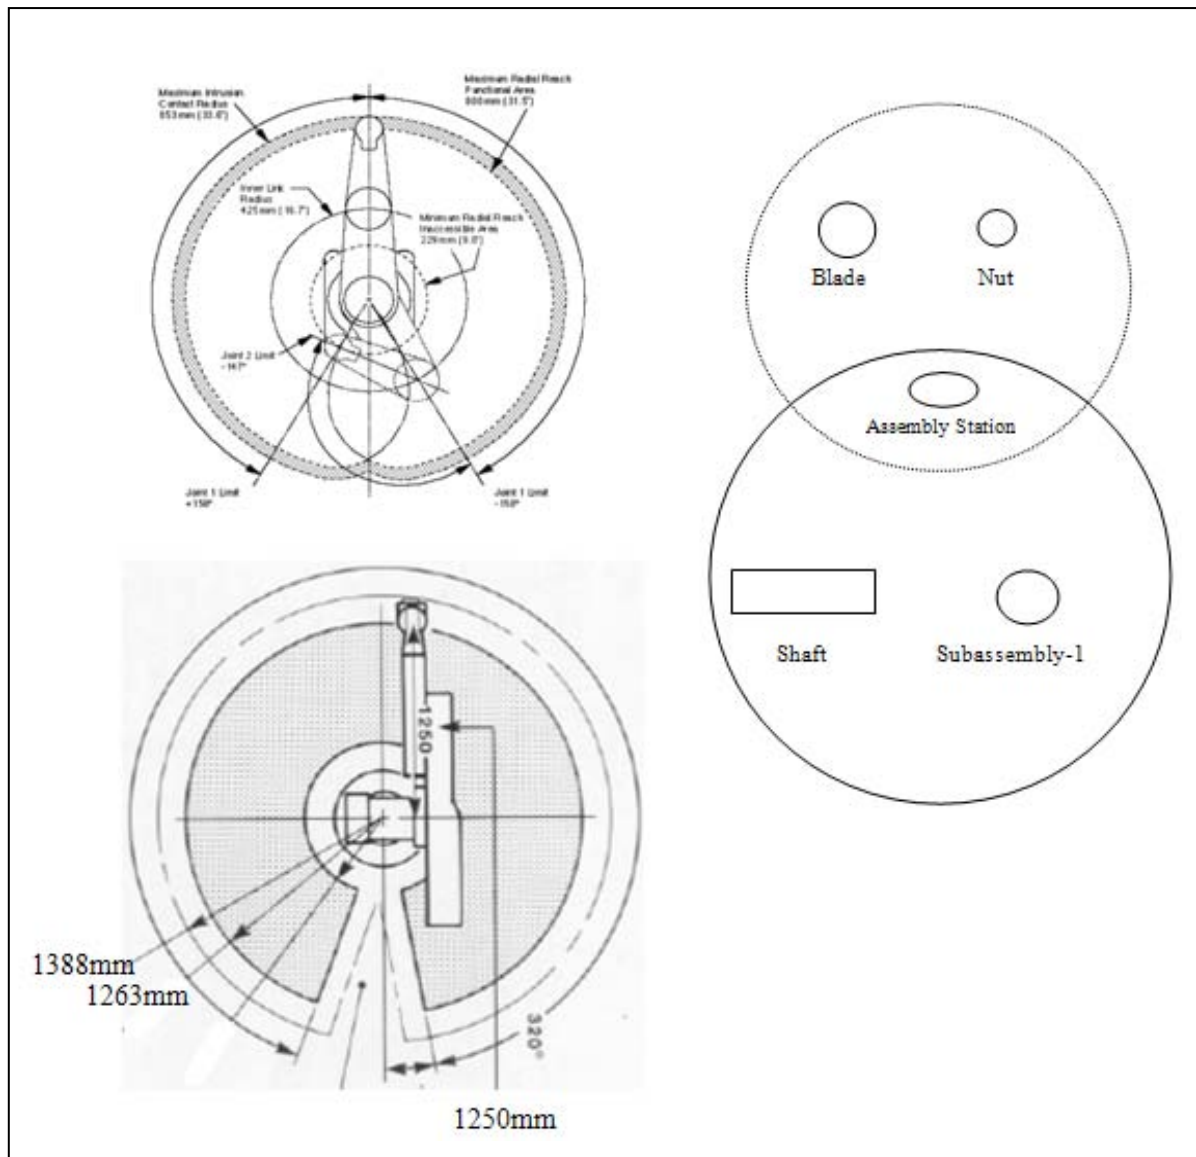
Workcell-3 for grinder assembly with Adept-one and Puma-762 Robot
